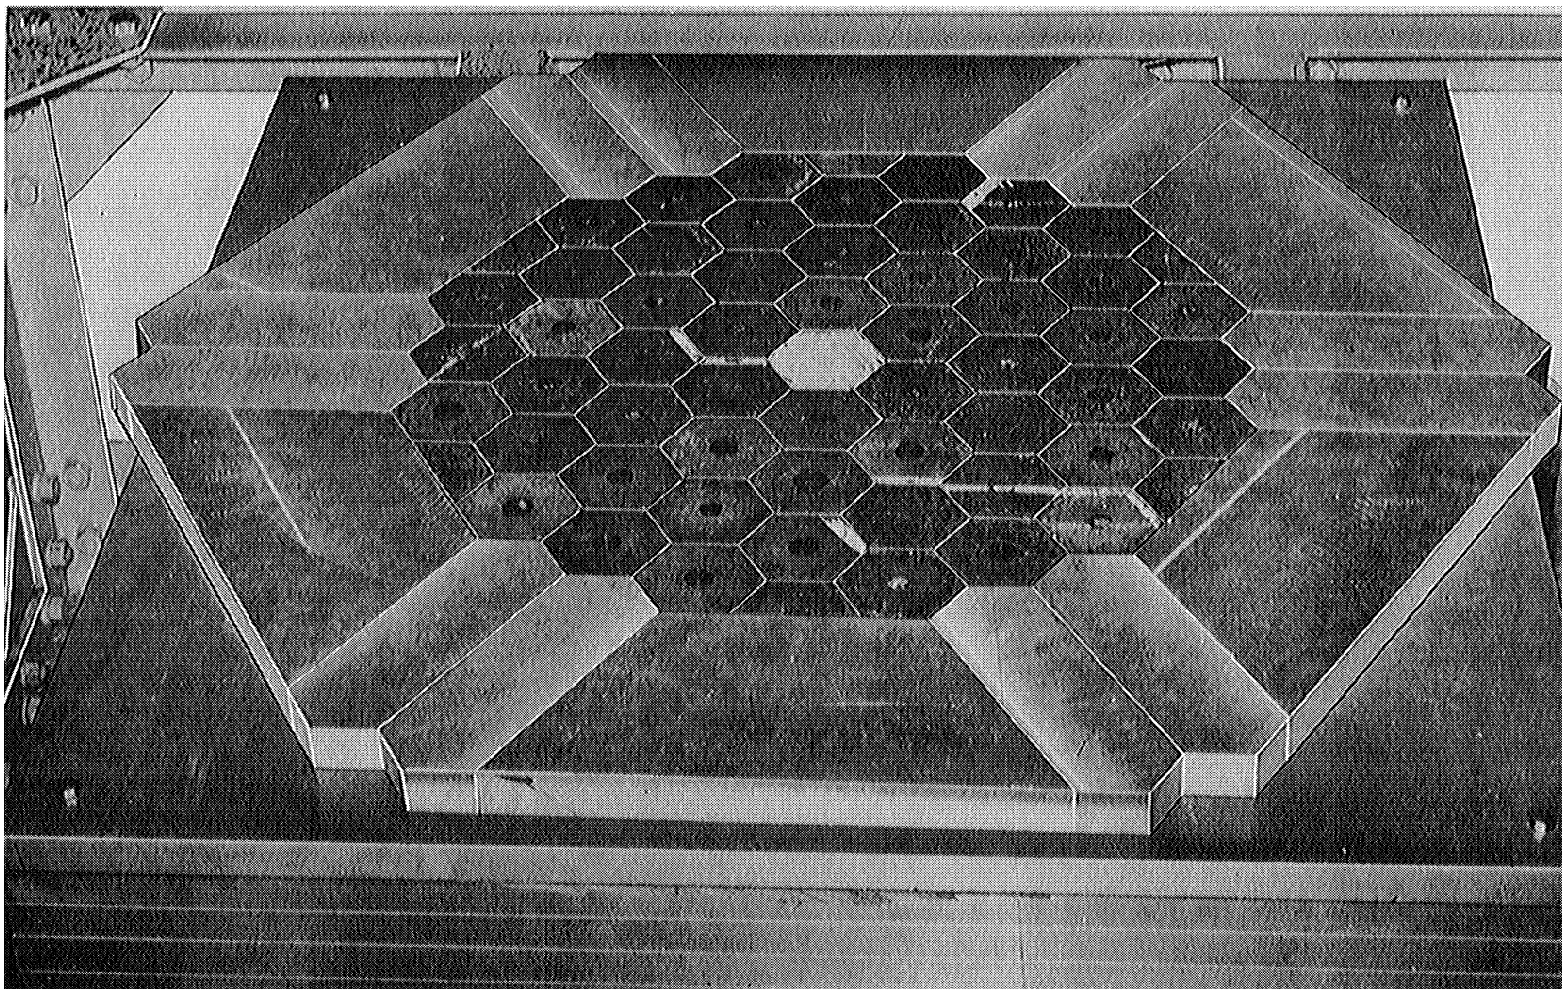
ALUMINIUM REFLECTED ASSEMBLY
